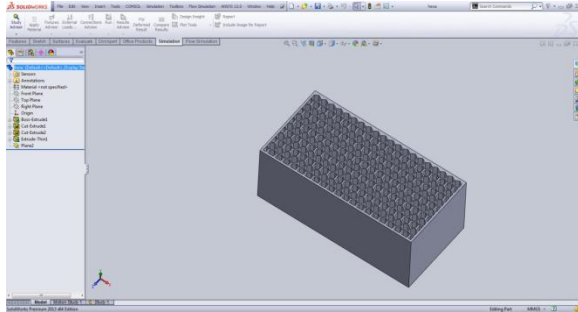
Traditional hexagonal cross-sectioned impact barrier Honeycomb Structure
